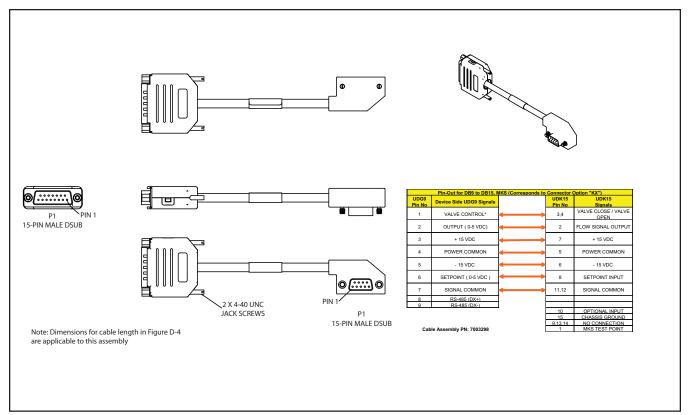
DB9 to DB15, MKS Cable Adapter Assembly
